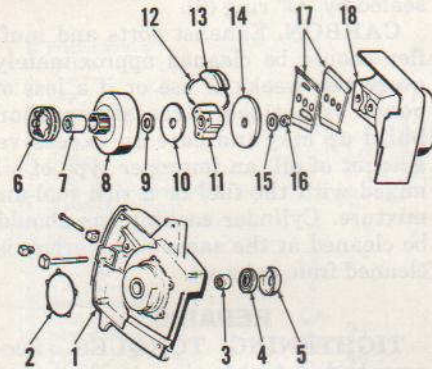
Exploded view of clutch used on models with automatic chain oiler. Parts shown in Fig. PR4-4 are located in main bearing housing (1) shown above.
